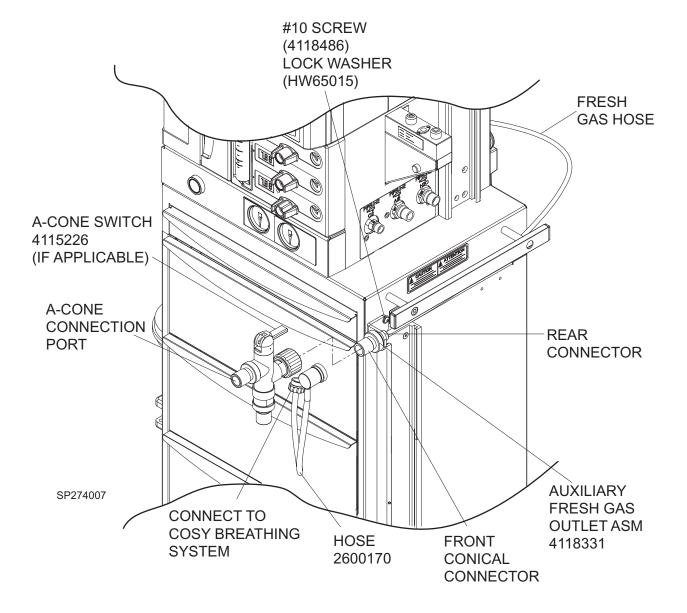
Right Side Trolley Mount Auxiliary Fresh Gas Outlet Installation
